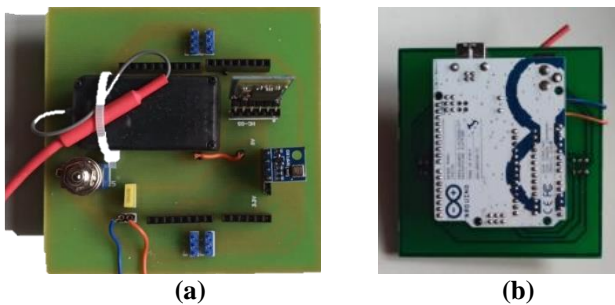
Flight controller board that has been designed (a) top view, (b) bottom view
